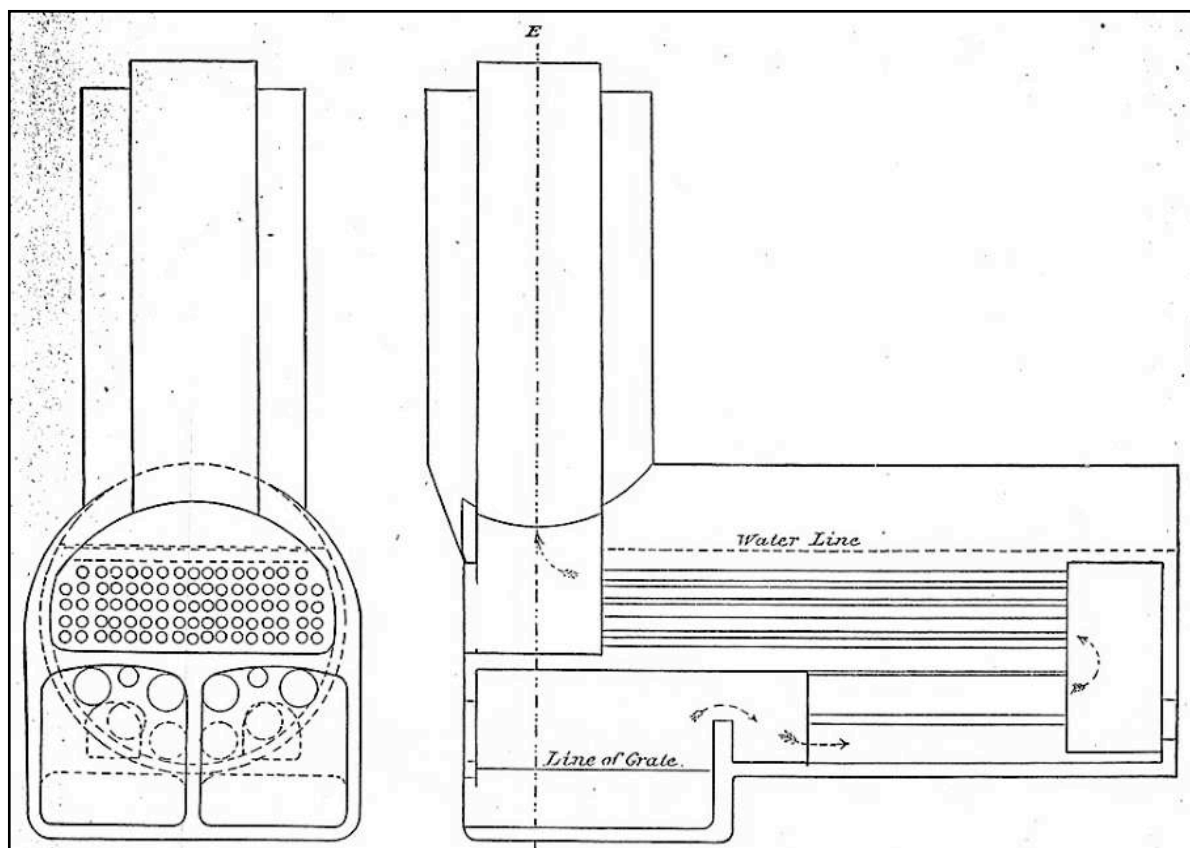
Return tube boiler drawing (U.S. Department of the Interior 1888:57).
